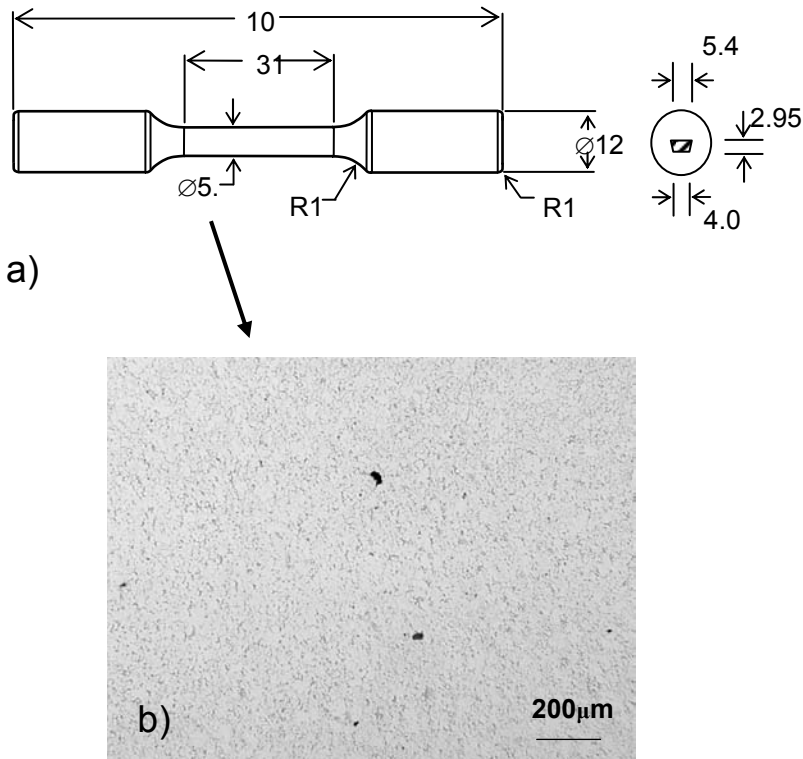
(a) Specimen geometry for both tensile strength and creep measurements (all dimensions in mm) and (b) low magnification image of the gauge length showing only a few small pores and no cracking
